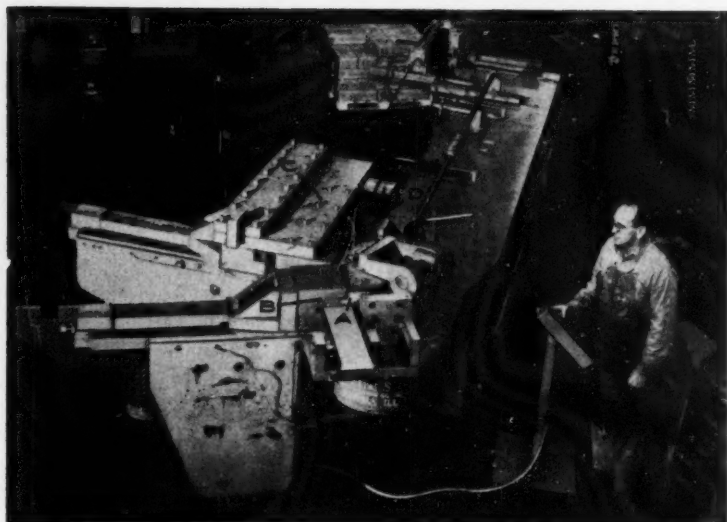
Another View of the Machine Set Up for the Edgewise, 10 $\frac{1}{2}$ -in. Radius Bending Operation on the Wide Steel Plate
